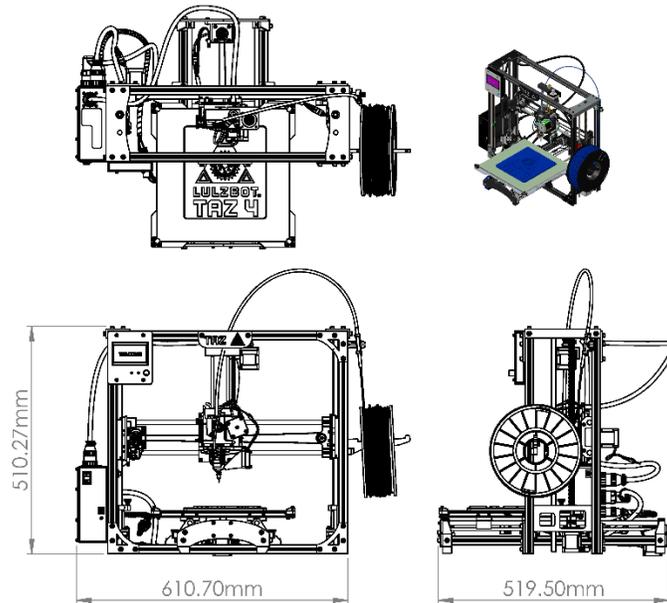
A model of the full 3D printer assembly with significant dimensions labeled.
